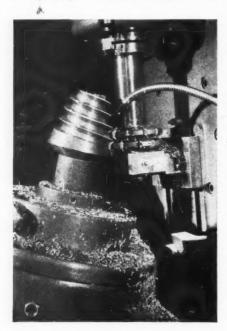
Close-up view of cutter on Cross Thread Miller in operation.
